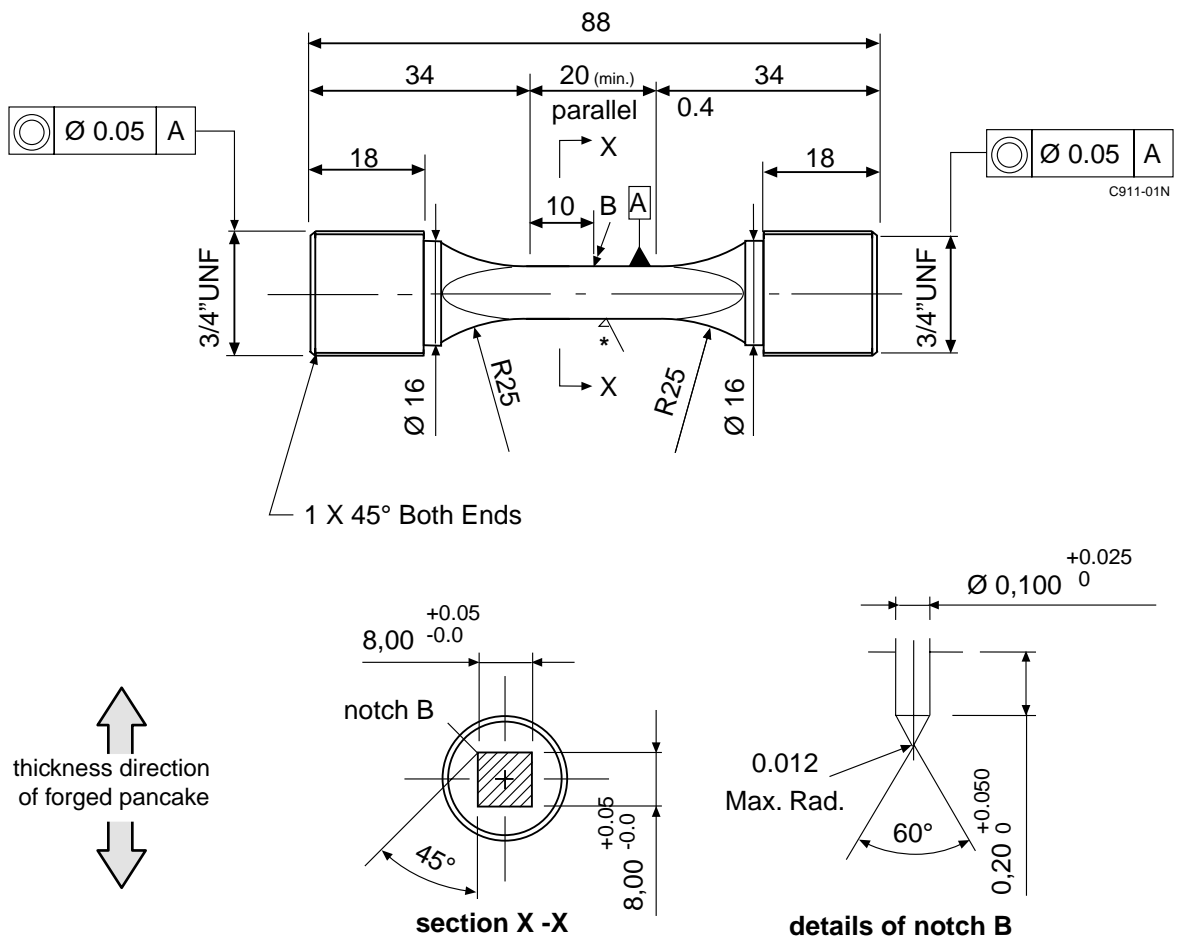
Corner crack (CC) specimen configuration used for crack growth testing: dimensions in mm
